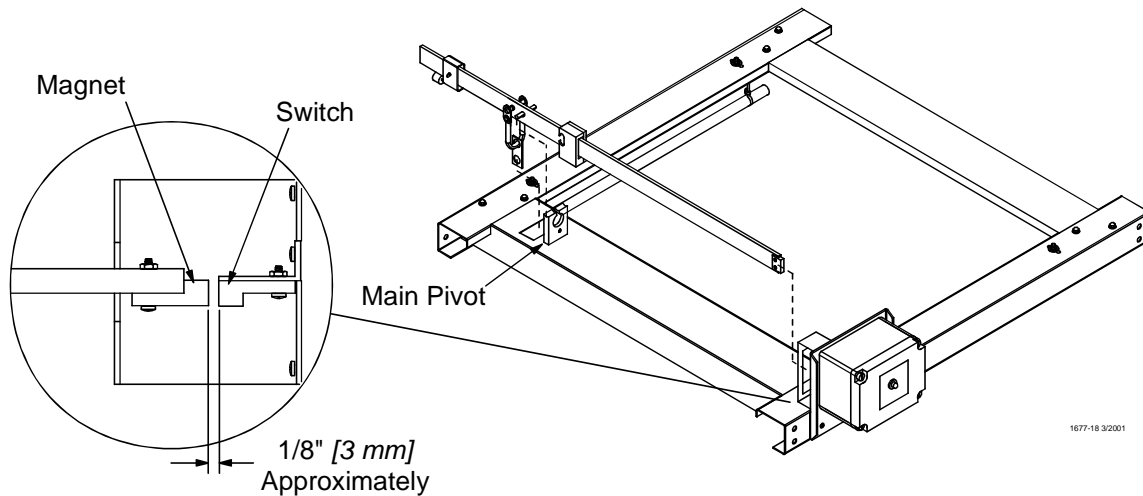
Installing the Beam Bar Assembly to the Scale Platform Assembly
